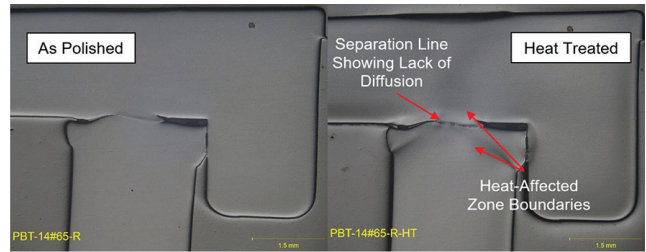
Cross section of PBT weld showing no intermolecular diffusion.
